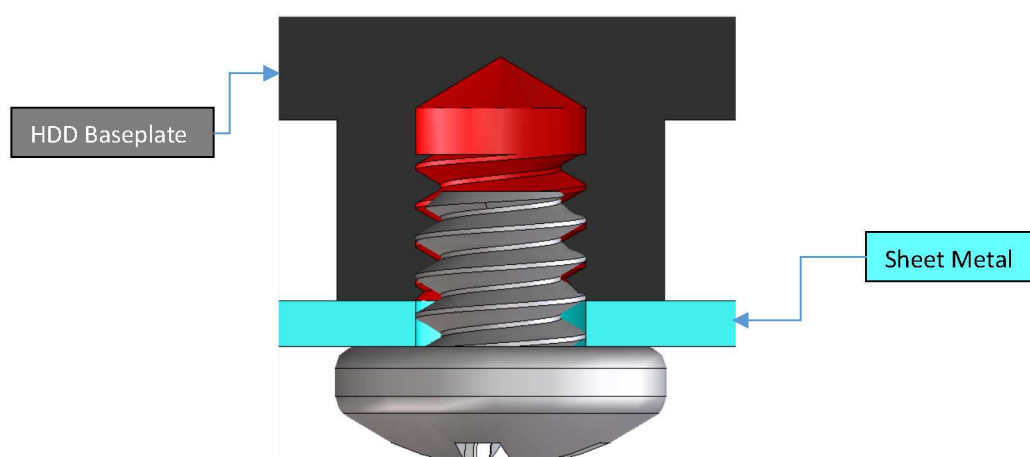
Bottom mount hole, 6-32UNC X 1/8" (2.8 threads engagement)
